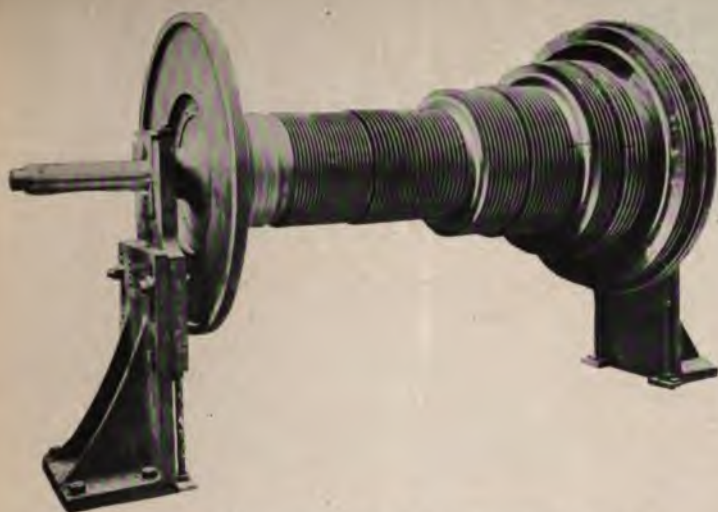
A.—Rotor of Brush and Parsons' Steam Turbine.
